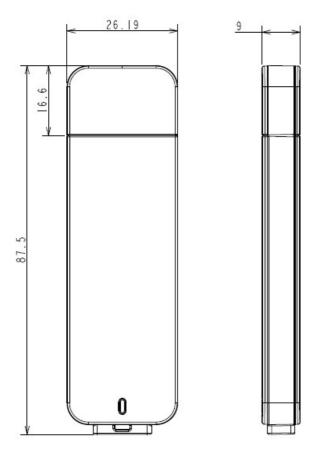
USB 3.0 EXPRESS RC4 Outline Drawing
